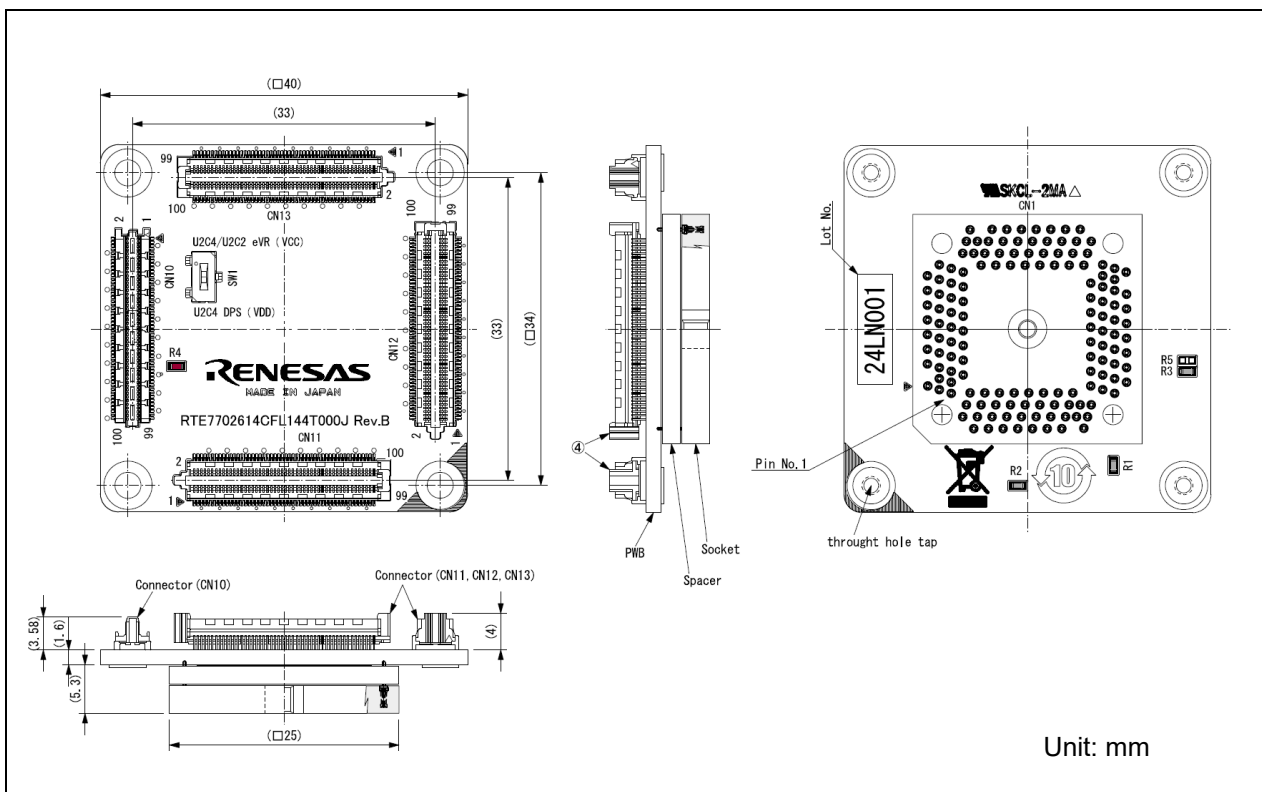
Dimensions of RTE7702614CFL144T000J (HLQFP144)
